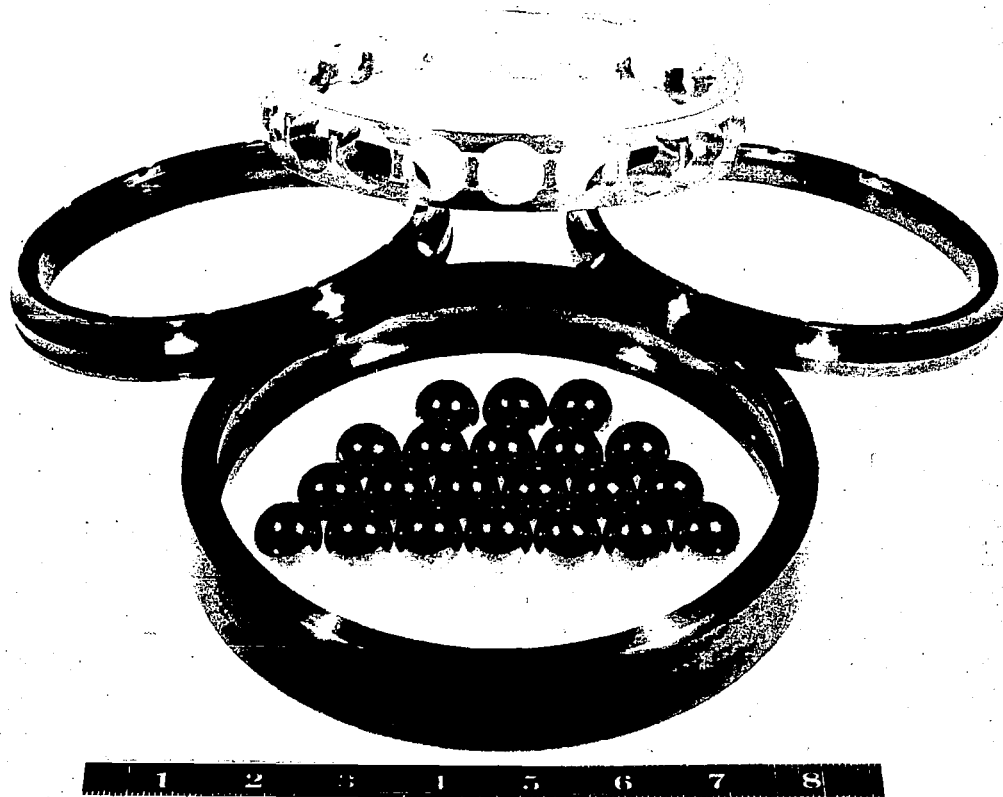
Overall View of Baseline Bearing S/N 2528A-1 After 23.15 Hours
